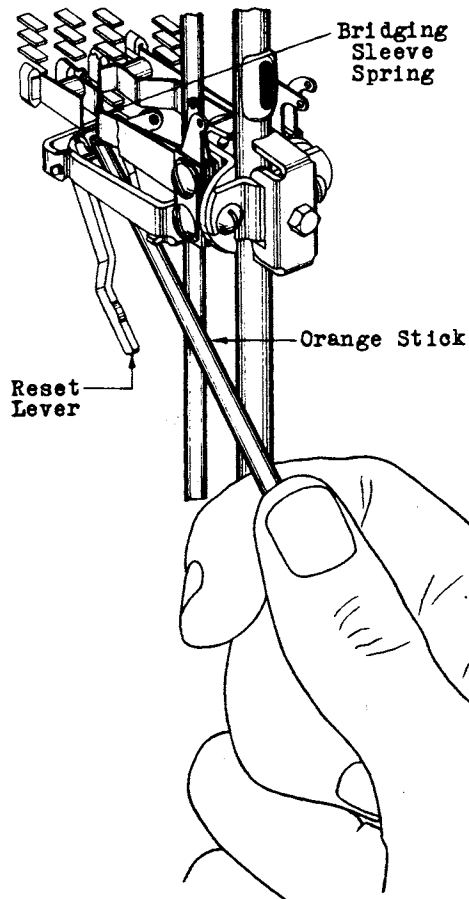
Fig. F - Method of Raising Bridging Sleeve Spring to Check Vertical Adjustment
